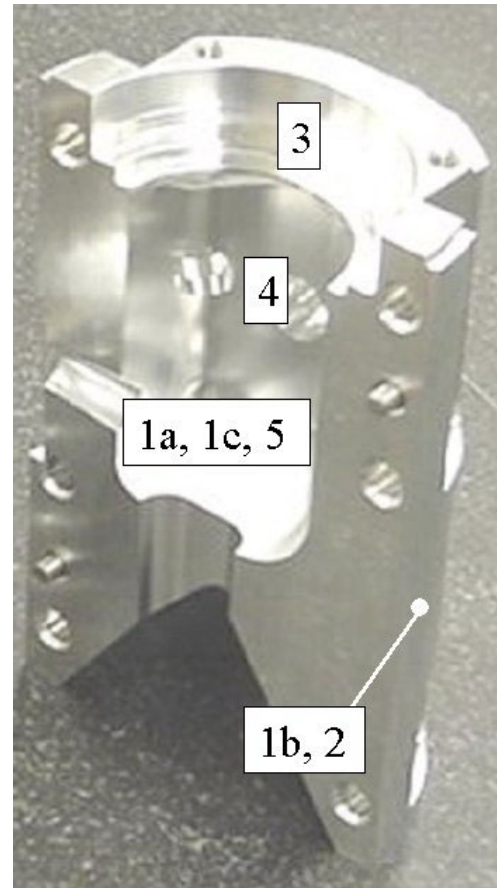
Locations on mold body # MT70874T01-202 where machining operations take place
